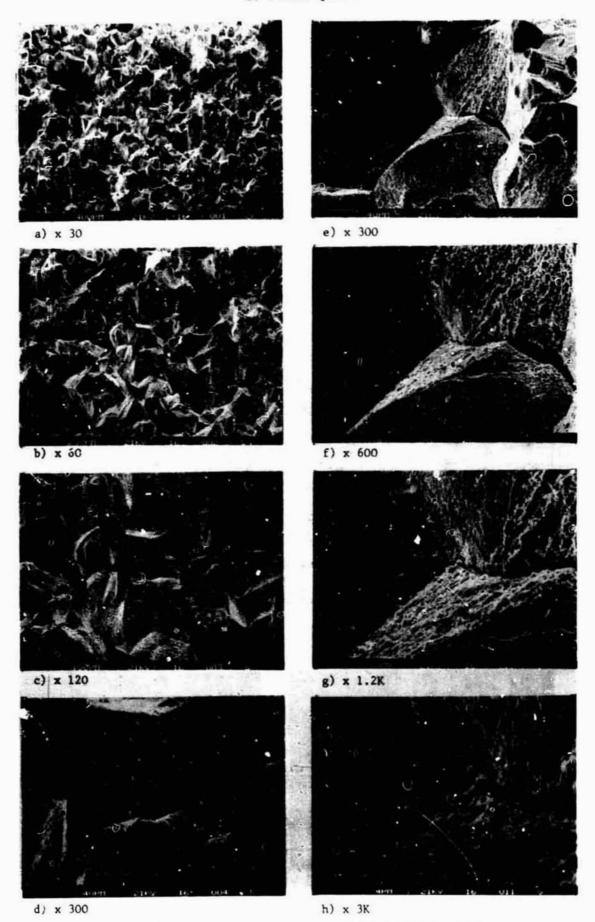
STEREOSCAN VIEWS OF -320F CHARPY FRACTURE SURFACE OF HIGHLY SENSITIZED NITRONIC 40. SPECIMEN ST168 (Roll No.2207).
